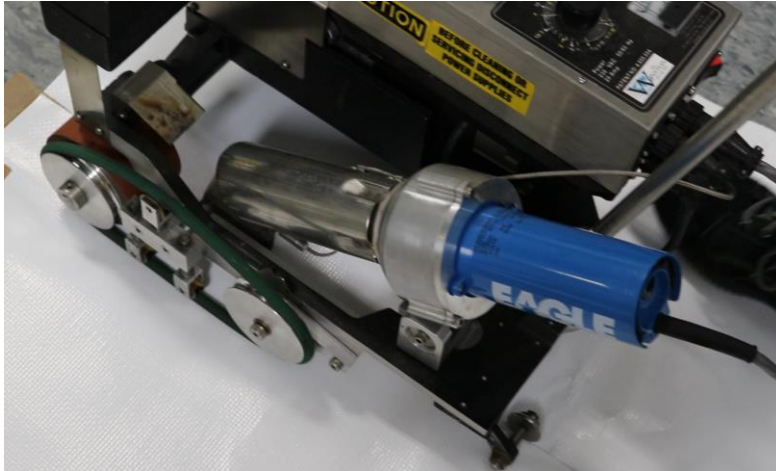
Top view of hot air floor crawler welder with nozzle between the overlapped fabric.
